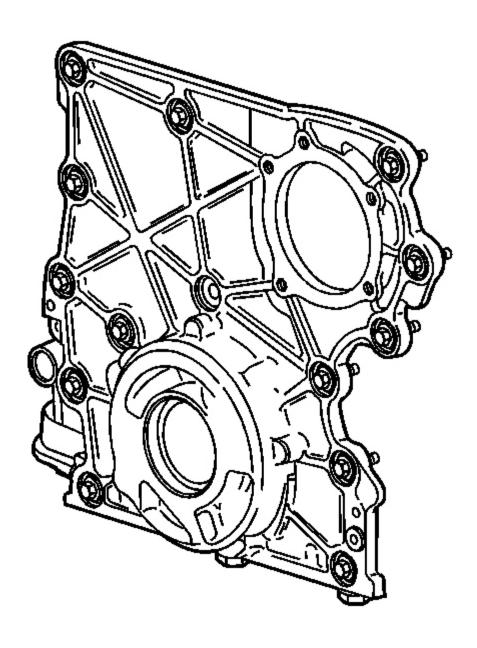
Inspecting Engine Front Cover Courtesy of GENERAL MOTORS CORP.
